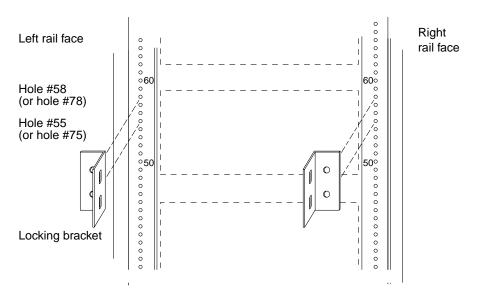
Locating the Locking Brackets on the Rail Faces
